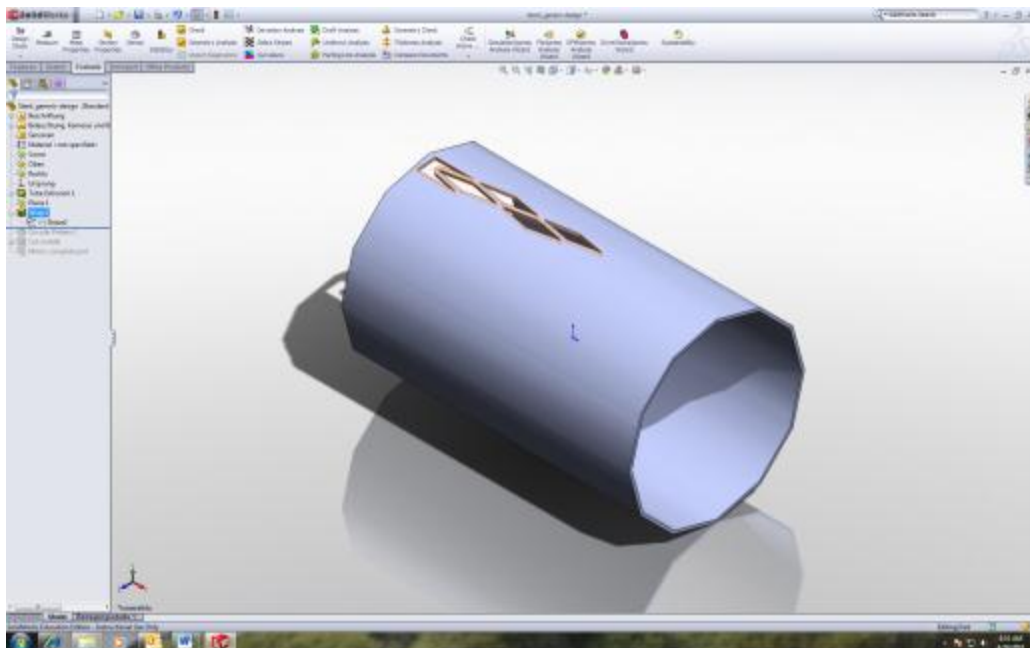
Admedes step 2 - Isometric view of Wrap feature
